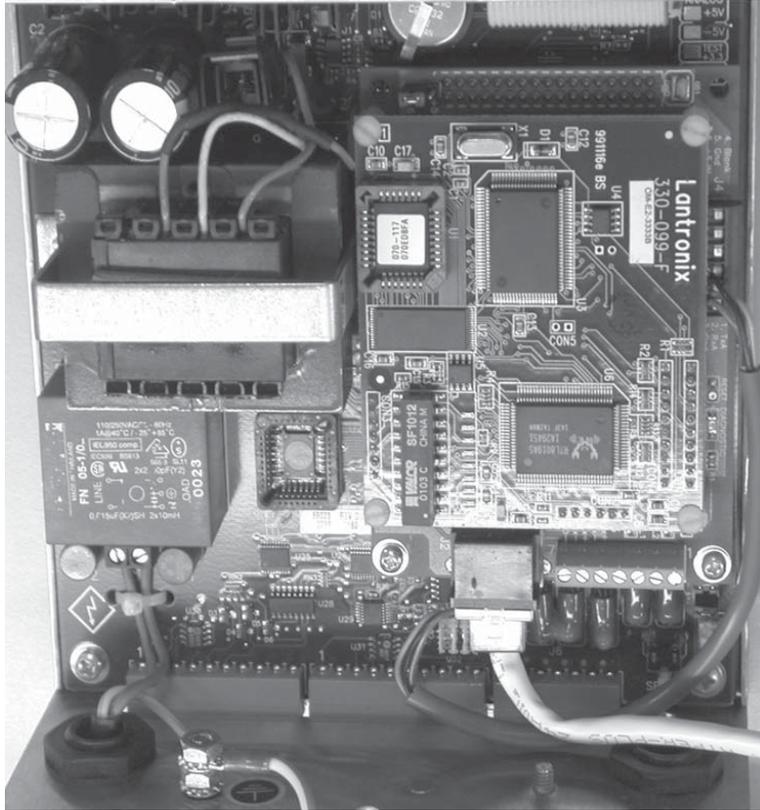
Ethernet Card Installation onto 520 CPU Board
